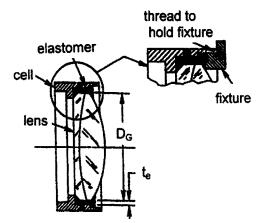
Technique for mounting a lens in an annular ring of cured-inplace elastomer. The detail view shows one way to hold the lens in place and constrain the elastomer with a tool while it cures.
